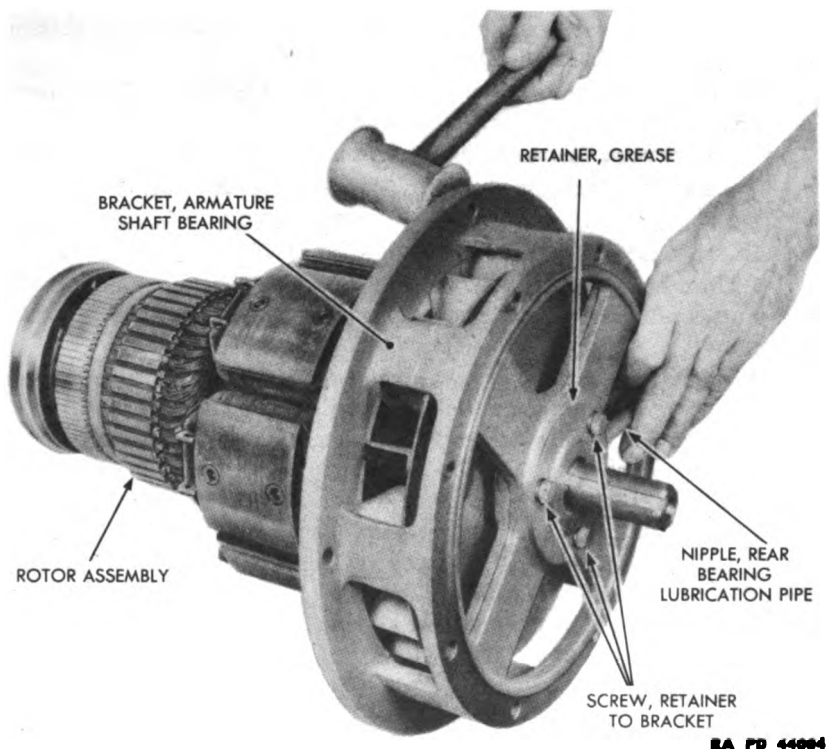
Removing Armature Shaft Bearing Bracket from Rotor Assembly
